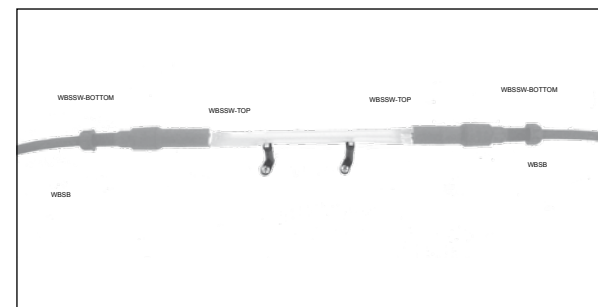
Final assembly of the WBSSW wetbits short sleeve wide
